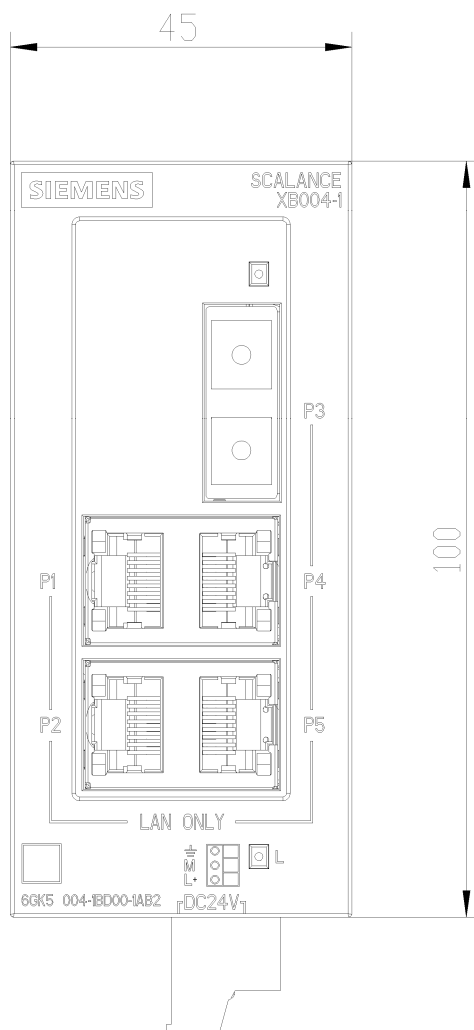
Dimension drawing, top view (example: SCALANCE XB004-1)
